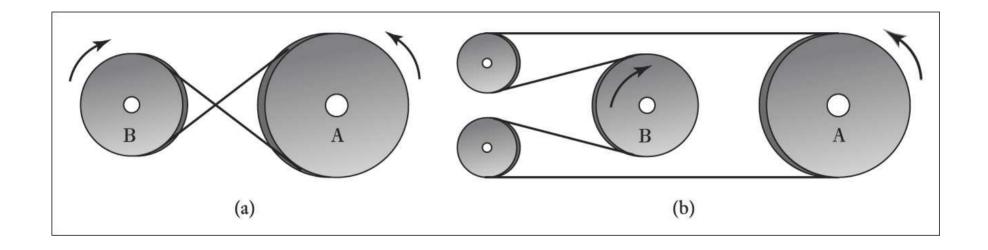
Reversed belt drives: (a) crossed belt, (b) open belt
